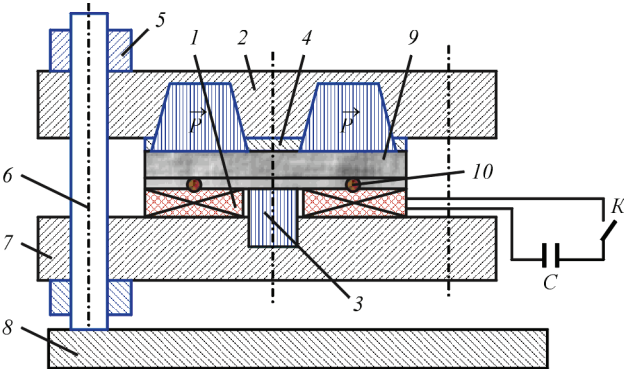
Structural design of PEMFT of metal materials: 1 — inductor; 2 — upper plate; 3 — axis for mounting inductor; 4 — specimen of welded joint of AMg6 alloy $\delta = 1.0$ mm; 5 — clamping nut; 6 — pin; 7 — lower plate; 8 — base support; 9 — current-conductive screen (Figure 1, c); 10 — specimen-simulator of welded joint; P — diagram of the distribution of electrodynamic force on the specimen surface; C — source of PEMF; K — key for starting discharge cycle
